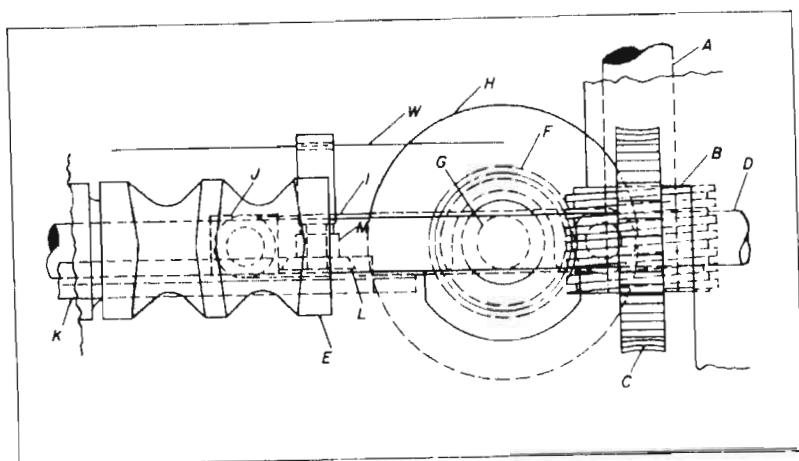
Sixty turns of shaft A are required to completely cycle follower M through a single out-and-back traverse of rotating cam E.
